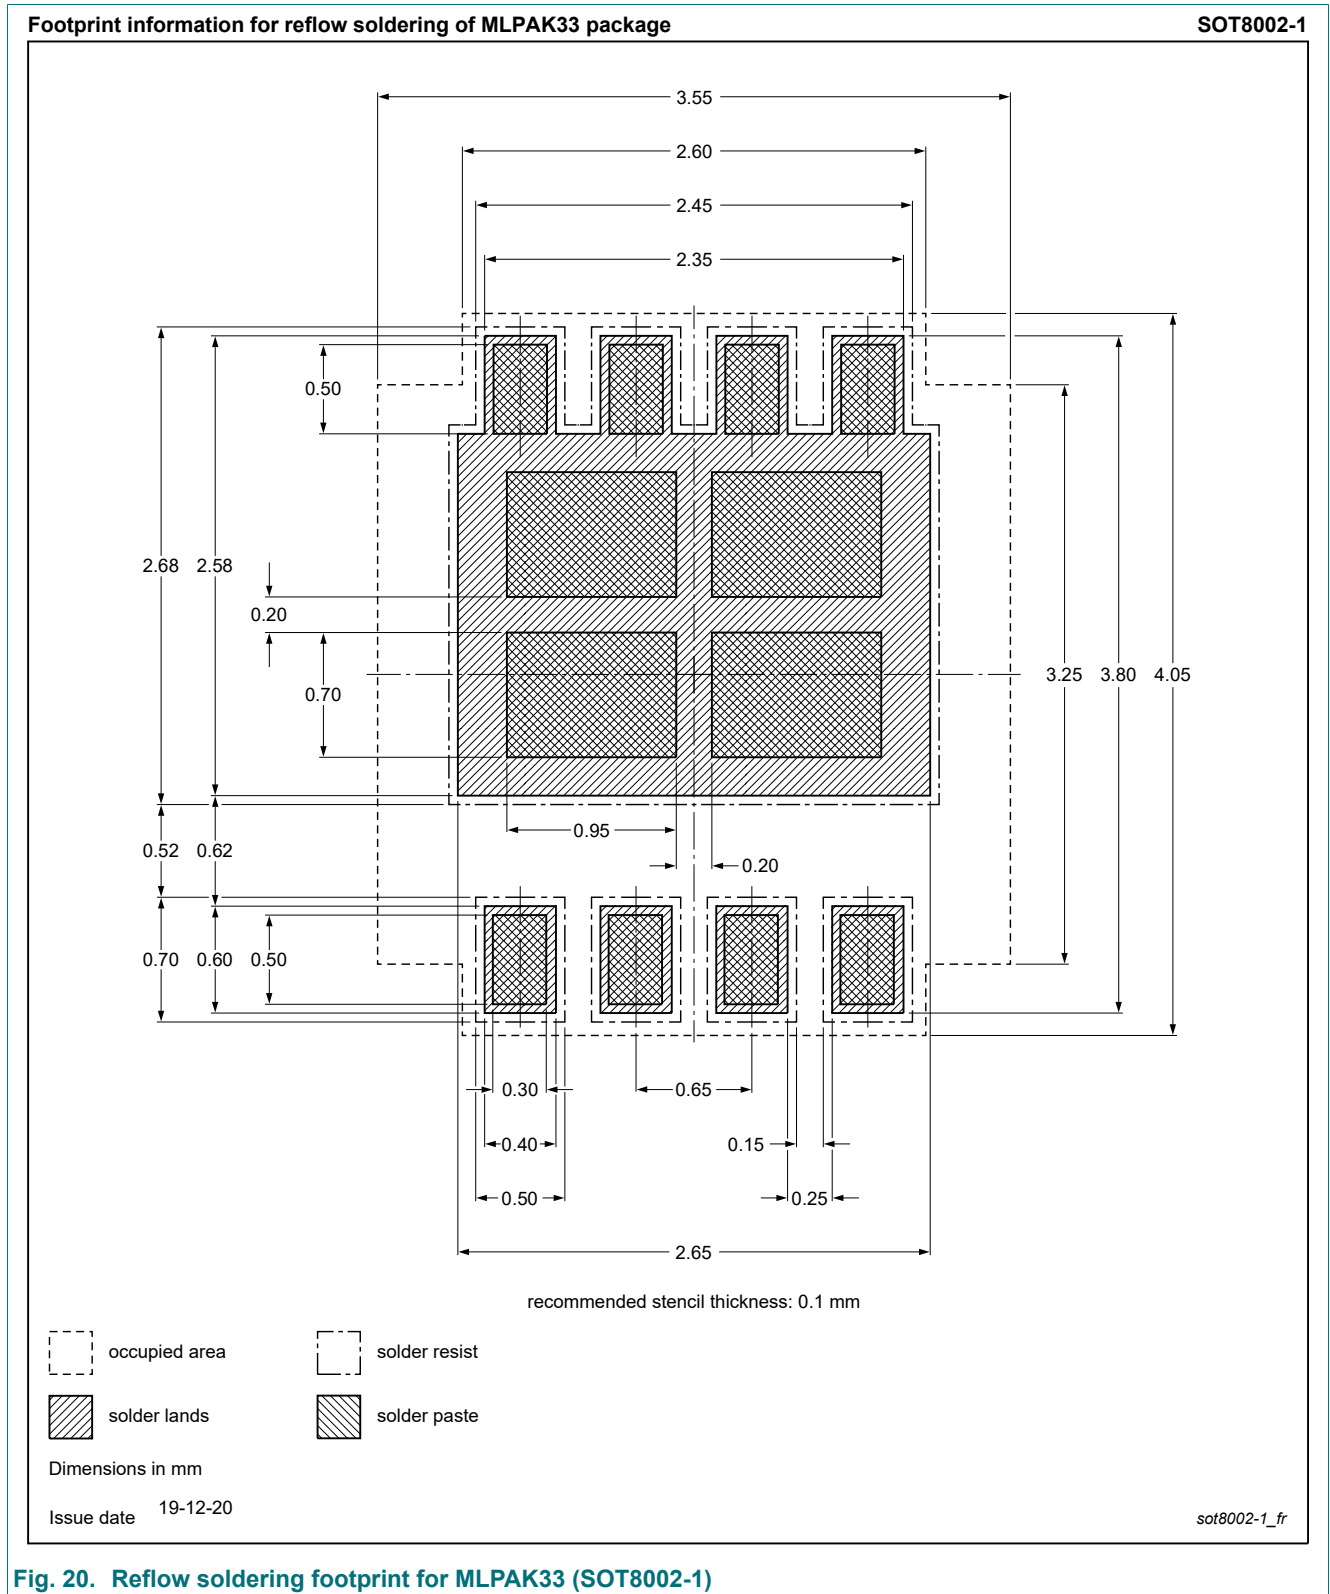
Reflow soldering footprint for MLPAK33 (SOT8002-1)
